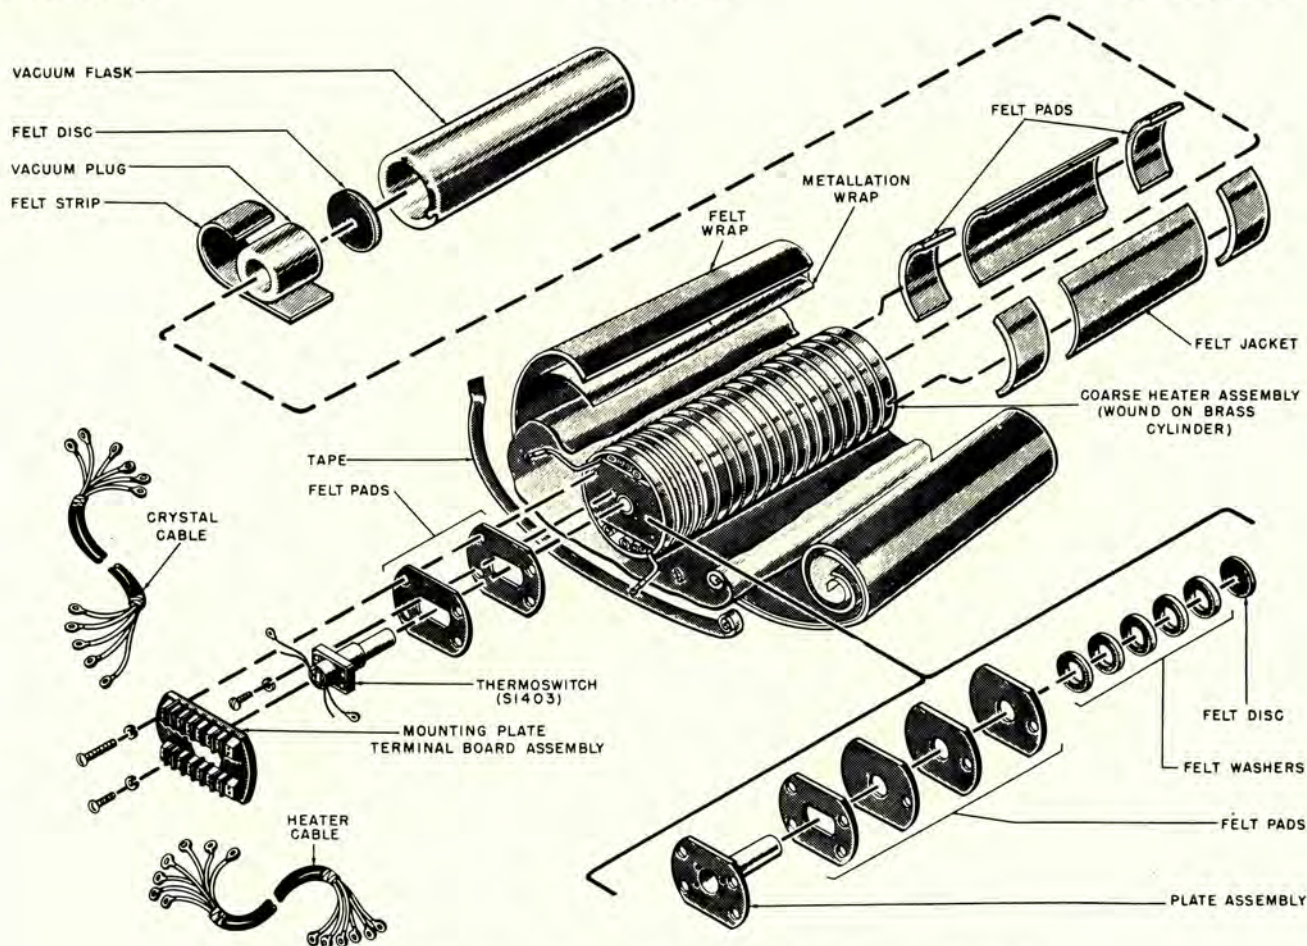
Exploded View of Oven Assembly, Showing Exploded View of Coarse Heater and Terminal End
